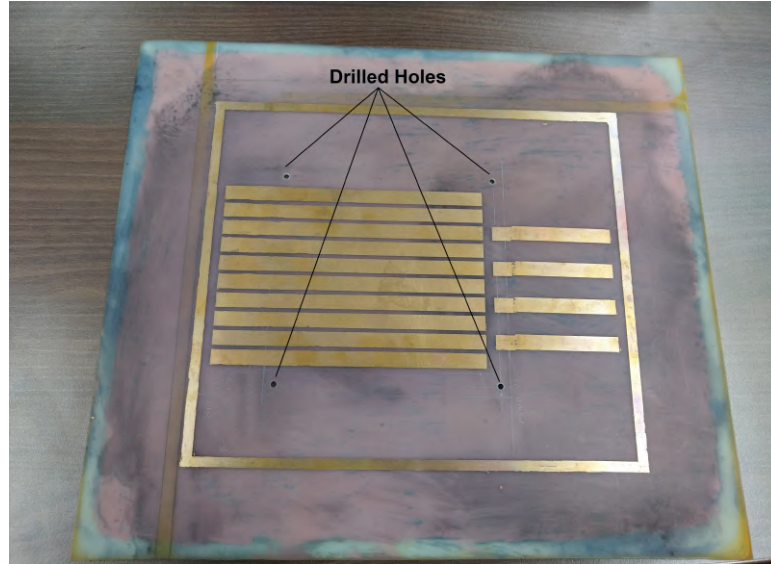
The PCB with the readout strips and other terminals after the chemical etching process. Four holes were also drilled which will be used to hold the Thick-GEM foil and the drift electrode.
